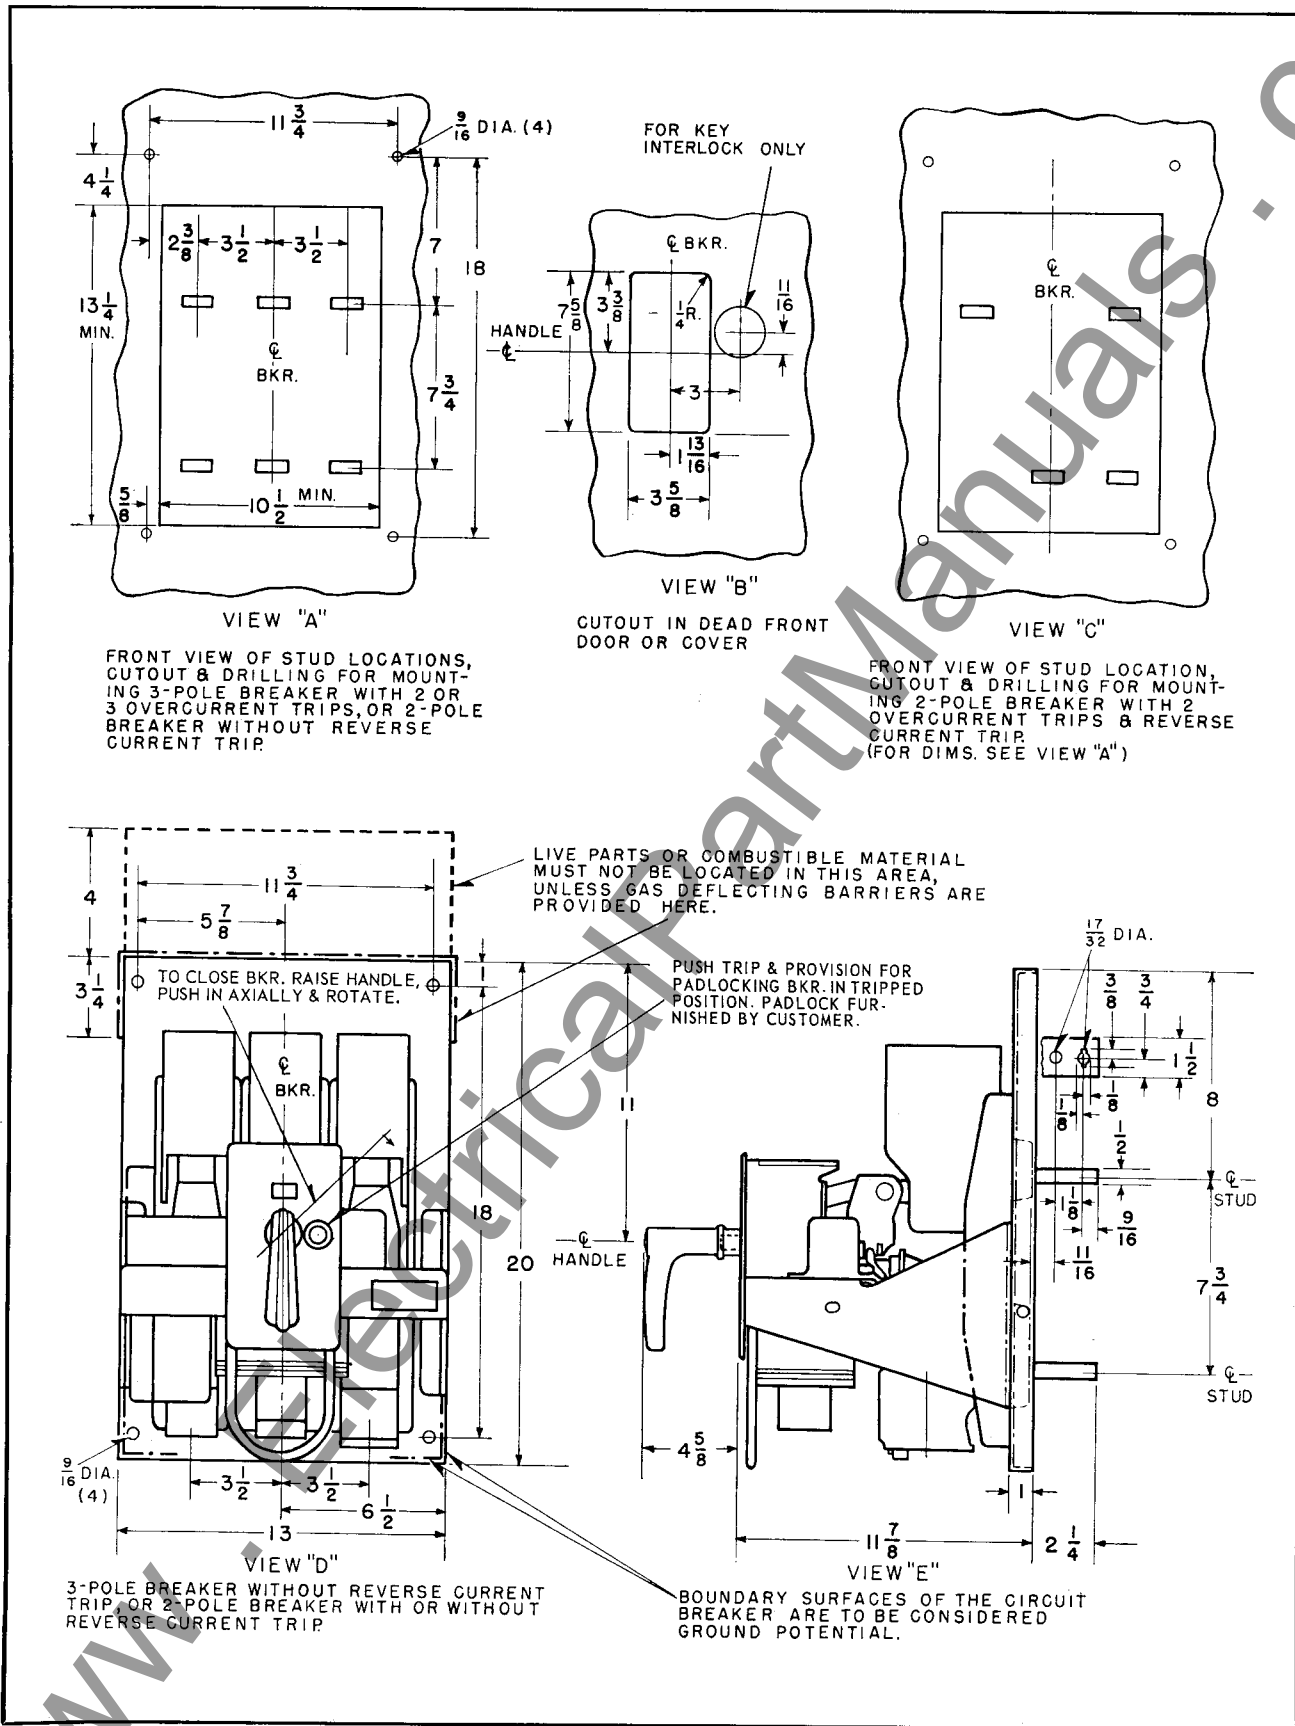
Ventilated Enclosures—Outline Dimensions and Mounting Details
